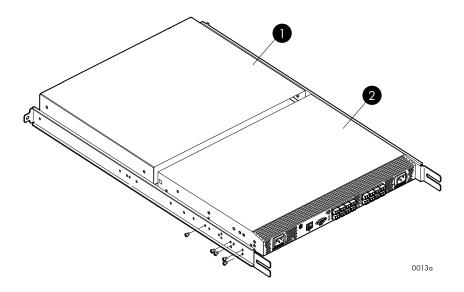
Assembling the inner rails on a SAN Switch with plenum
